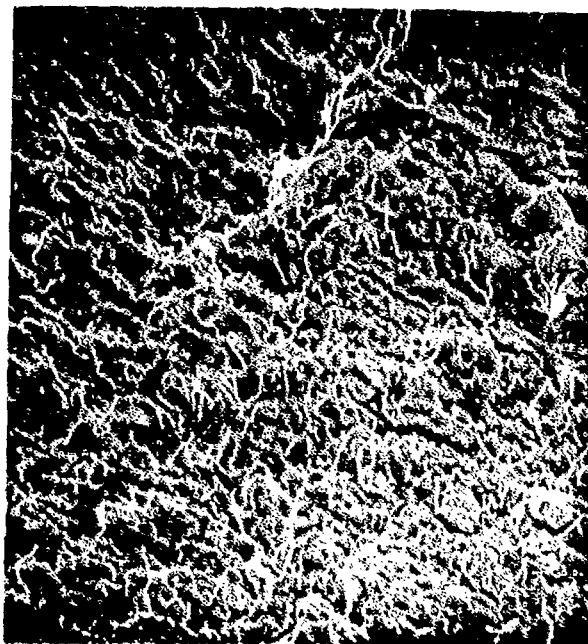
Fatigue region of fracture surface of AX-110 weldment containing LOP, 1700x.
